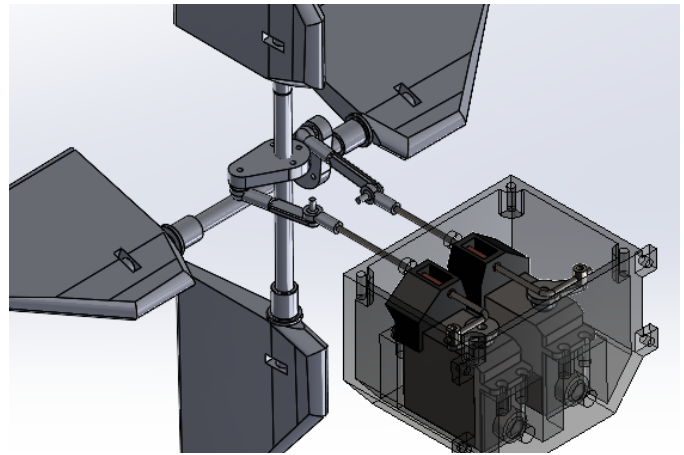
Servo Box drive shaft connection to the elevator and rudder fins.
